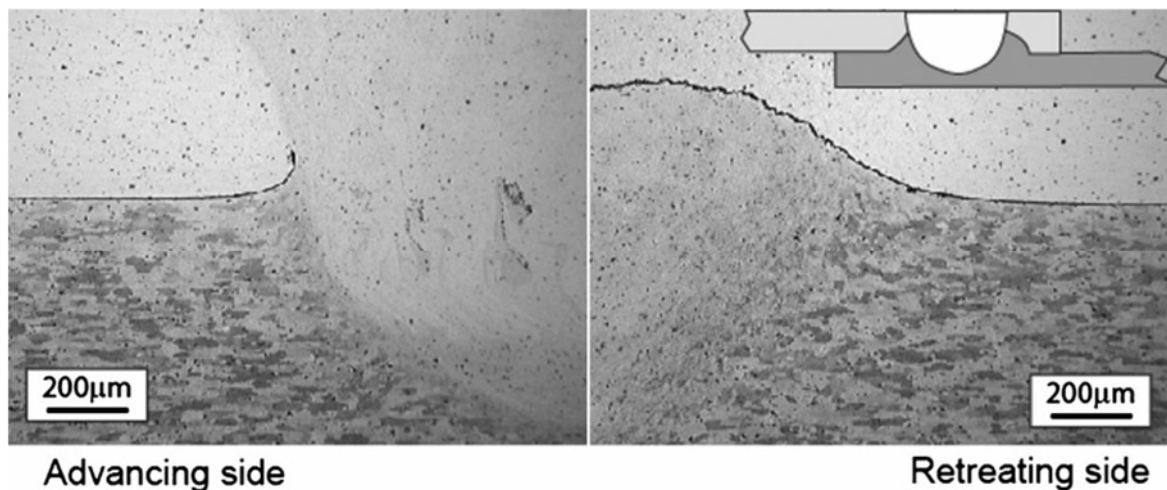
34 Lap weld defects showing hooking on advancing side and plate thinning on retreating side in lap welds between 7075 (upper) and 2024 (lower) alloys [109].
